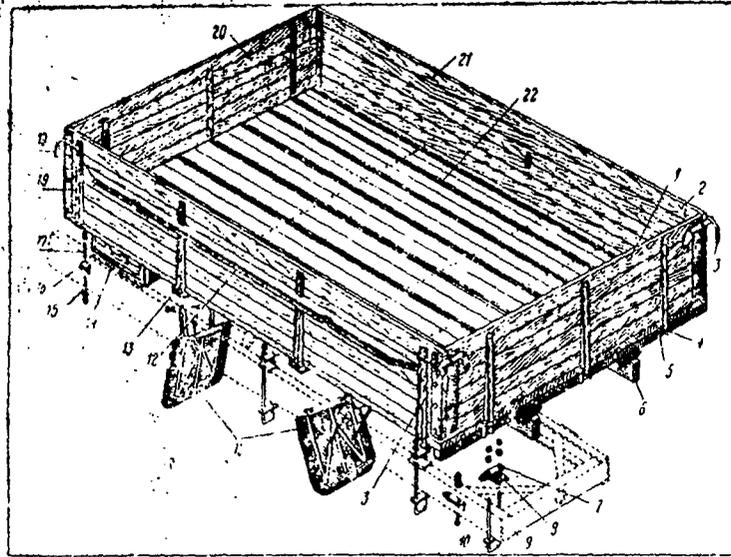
Platform of ZIL-130: 1, rear wall; 2, side wall; 3 and 19, lock bolts; 4, lower loop; 5, support pin; 6, longitudinal beam; 7, cover; 8, clamp; 9, frame; 10, stirrup; 11, spray shields; 12, supplementary beam; 13 and 18, upper support loop; 14, tool box; 15, bracket bolt; 16, bracket; 17, spring; 20, front wall; 21, bolt; 22, platform base
